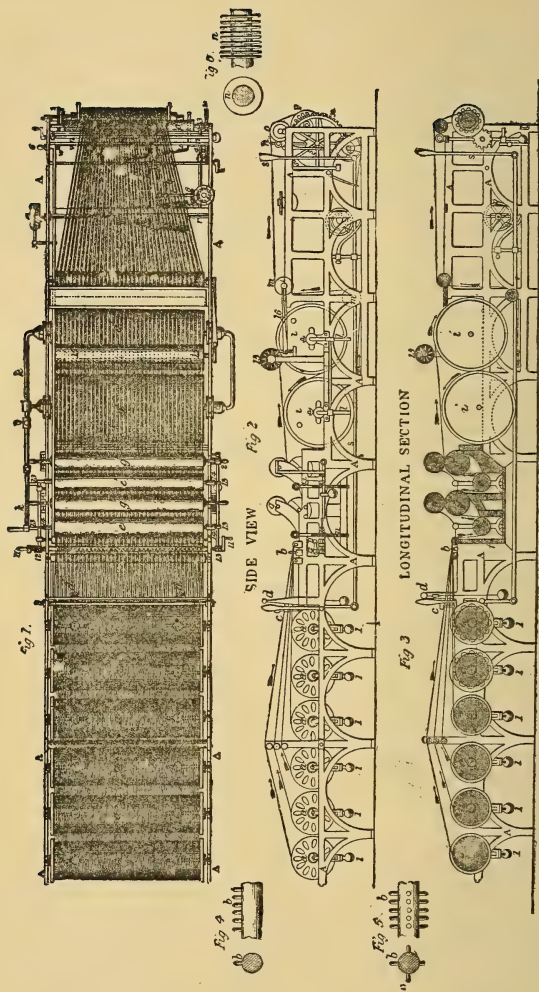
VIEWS OF ORIGINAL TAPE-SIZING MACHINE.
